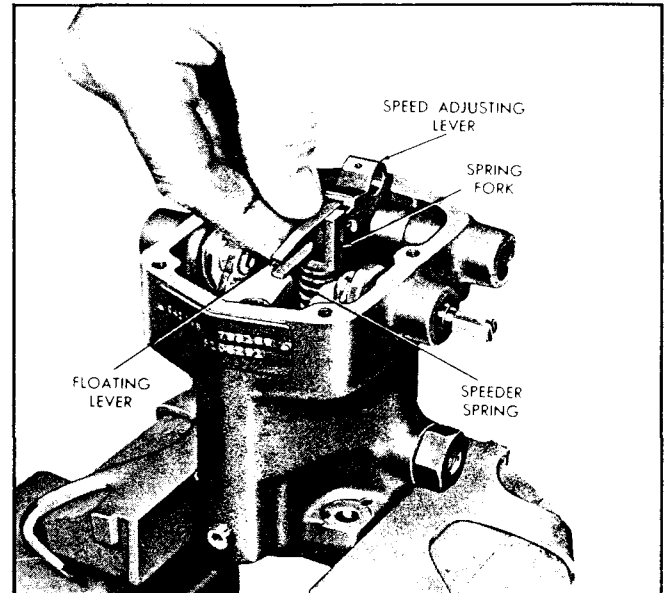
Removing Speed Adjusting Lever, Floating Lever, Spring Fork, Speeder Spring and Pilot Valve Plunger Assembly
